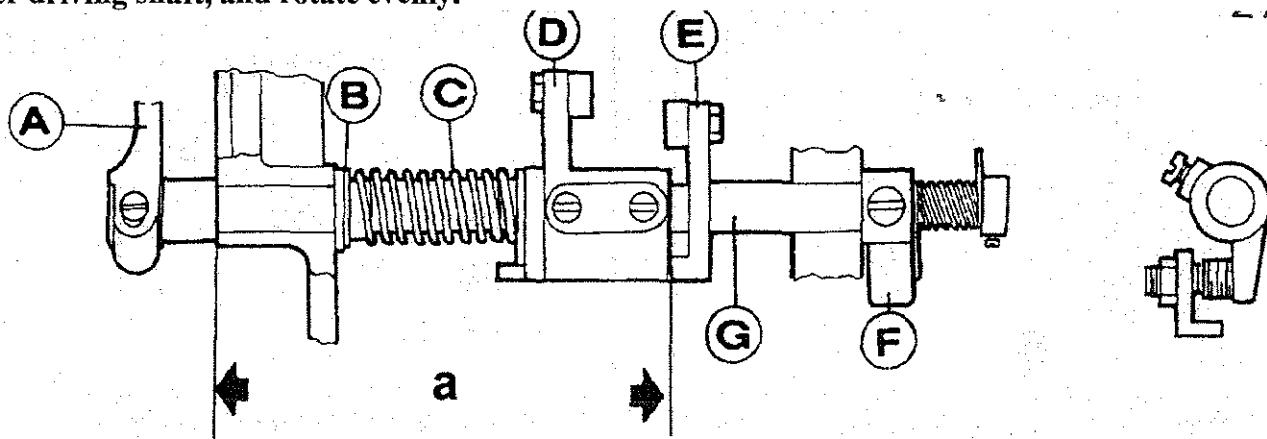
B-spring end cover C-spring E-thread cutting cam crank 2
